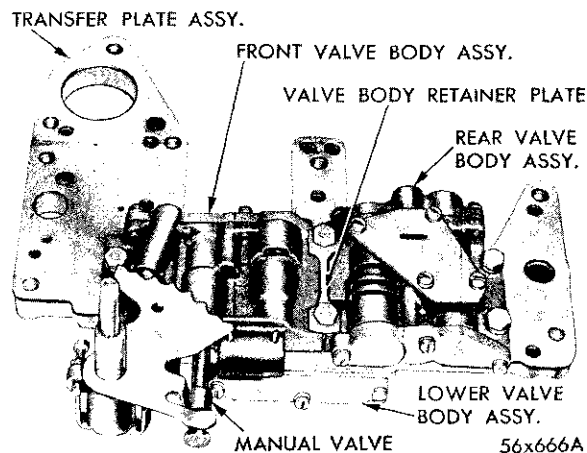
Valve Bodies and Transfer Plate Assembly (Bottom View)
